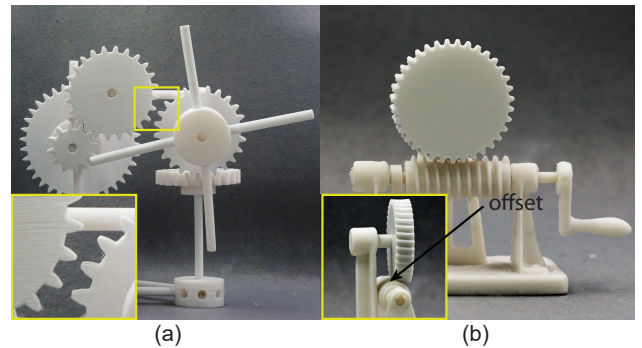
(a) shows that a small position offset breaking the placement constraint would make a gear disconnect with another in a gear train after fabrication; (b) shows that the locally reconstructed worm gear fails to mesh with the worm because the mechanical parameters do not satisfy the meshing constraint.
